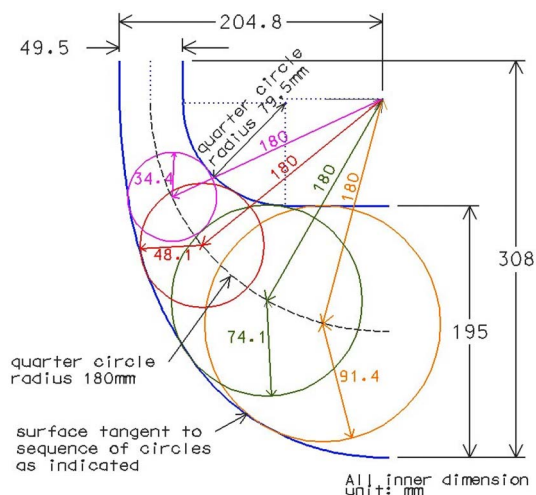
Schematic showing the design of the 90 deg-curved diffuser model. All dimensions are in millimeters.
